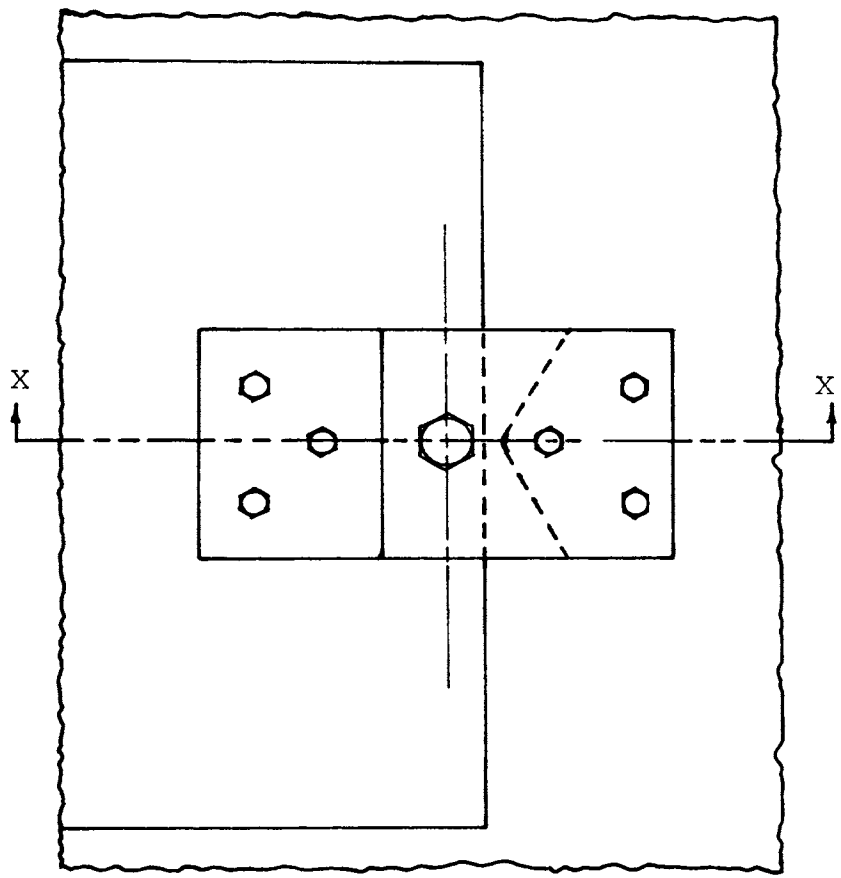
Drive Shaft Bearing Support (Type 2)
